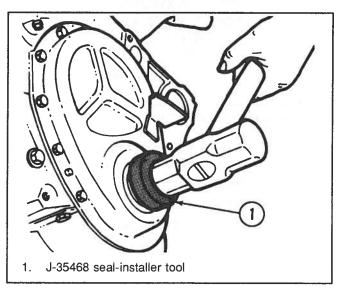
Installing Front-Cover Oil Seal – Cover Installed
